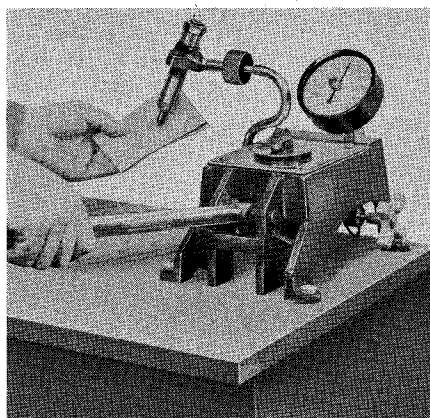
A fuel injector tester such as the one shown is necessary for checking and adjusting fuel injector assemblies. Nozzle seat leakage check is illustrated; refer to paragraph 120.
